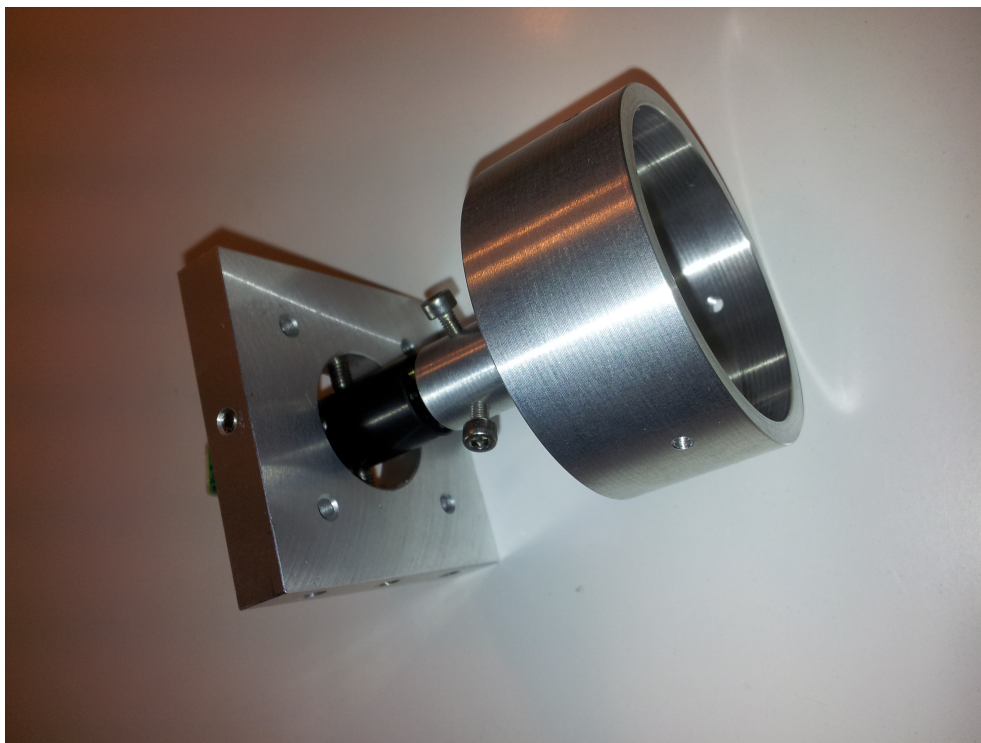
A detail of the adaptation crown that connects the motor shaft to the rotary knob. This piece is standard from the side of the knob, and the drill to connect the motor axis is mechanized for each model of motor. In this picture, an *Arsape* motor (small black cylinder traversing the plate on the left) is temporarily connected in the interchangeable plate with the locker screws.
